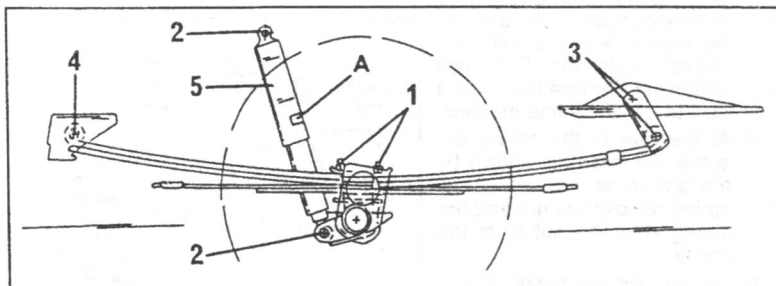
Side view of the rear suspension on one side in the case of a four-wheel drive vehicle. The shock absorber identification can be found at "A".
